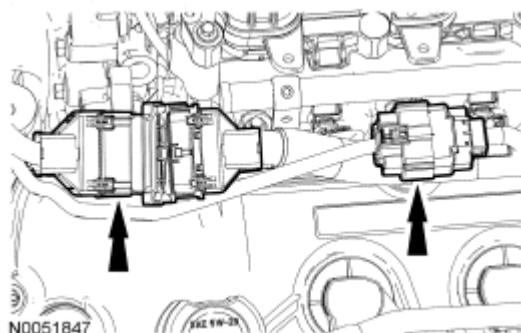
Identifying Engine Wiring Harness Electrical Connectors
